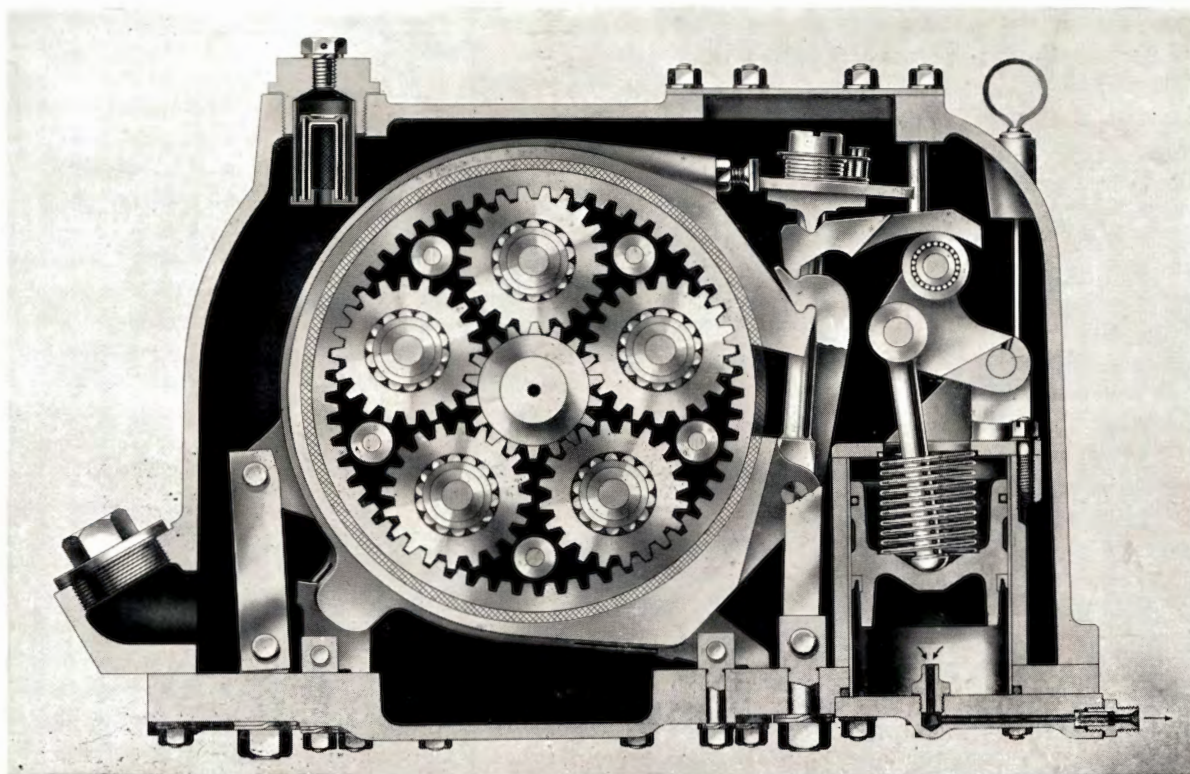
SECTION THROUGH THE 1st SPEED BRAKE BAND (BRAKE ON)
